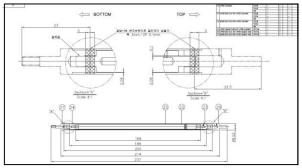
Drawing of SFR metallic fuel rodlet for irradiation test.
